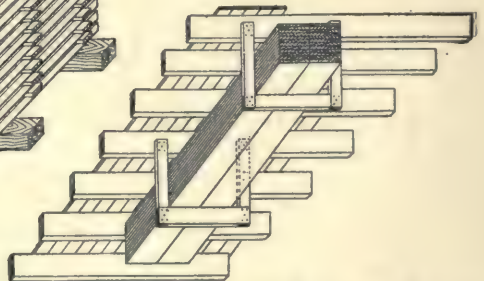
Beam or Ceiling Hangers for Storing Lumber in Carpenter Shops.
